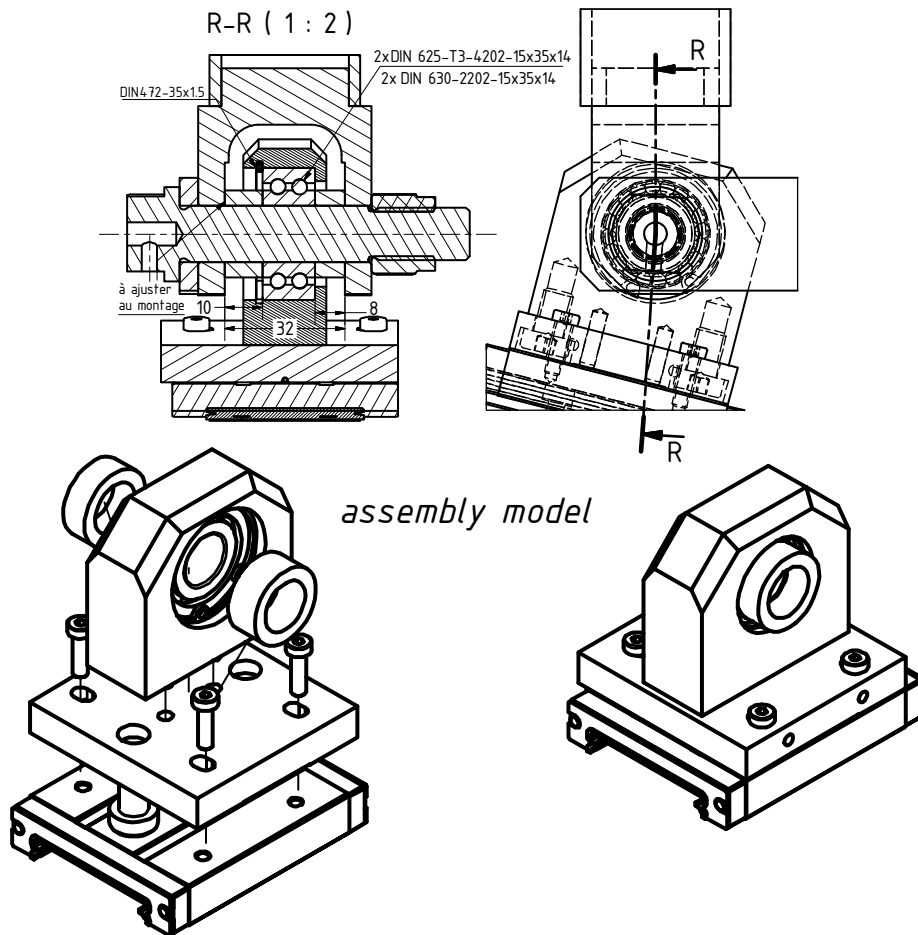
Assembled housing of the radial bearings and its connection with the carriages of the linear bearings.
